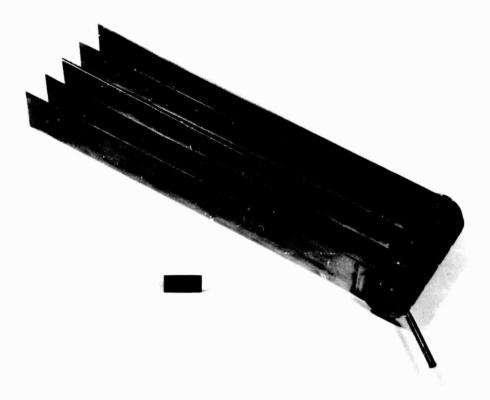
Collector-end-vapor chamber fin assembly (shown without outer members).
